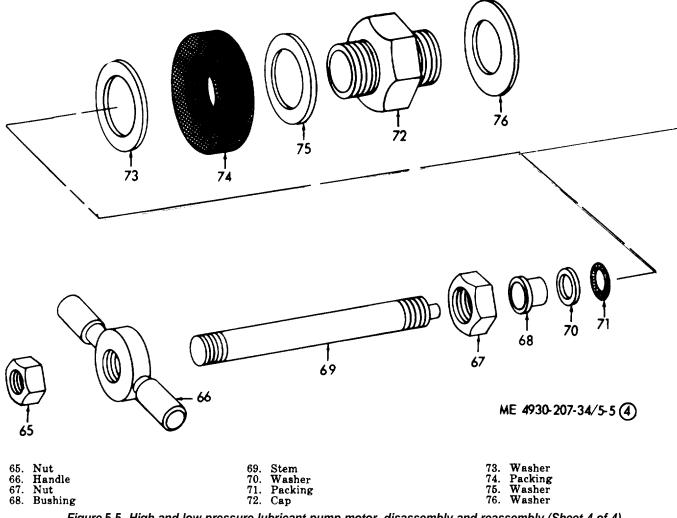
High and low pressure lubricant pump motor, disassembly and reassembly (Sheet 4 of 4).
